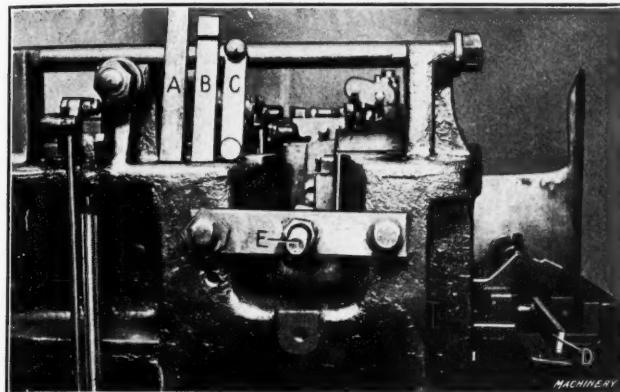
Making Draw-bar Hangers in a 3-inch Ajax Forging Machine
